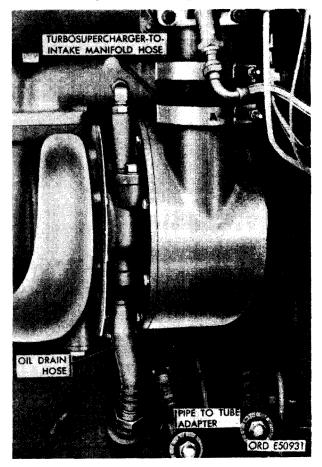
DISCONNECTING OR CON-NECTING TURBOSUPERCHARGER -TO - INTAKE MANIFOLD HOSE AND OIL DRAIN HOSE (EARLY MODEL ENGINES).
